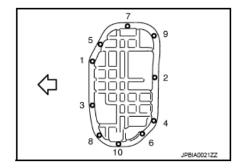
Lower Oil Pan Mounting Bolt Tightening Sequence Courtesy of NISSAN NORTH AMERICA, INC.
